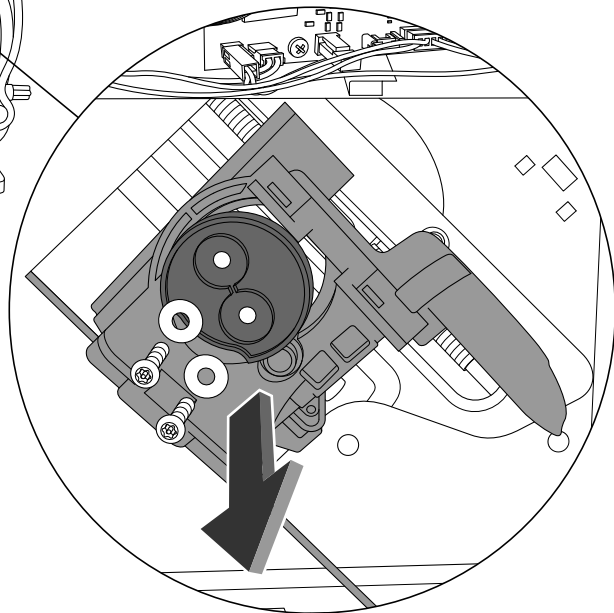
TO REMOVE TRANSMISSION KIT
